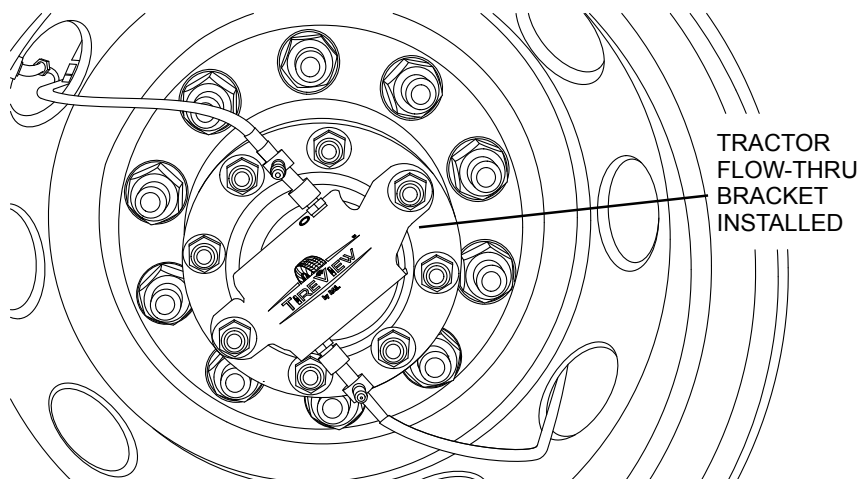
Tractor Flow-thru Bracket Installed - R-Spindles
